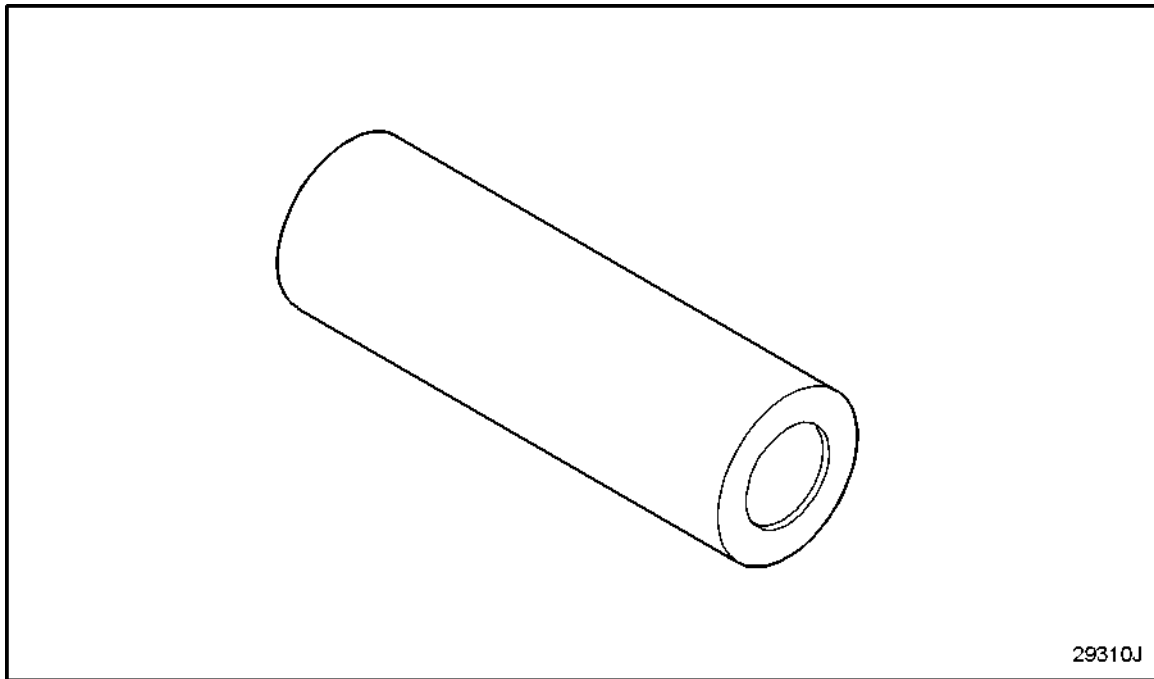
Gear Installer (8.060") (16V),J 9382
